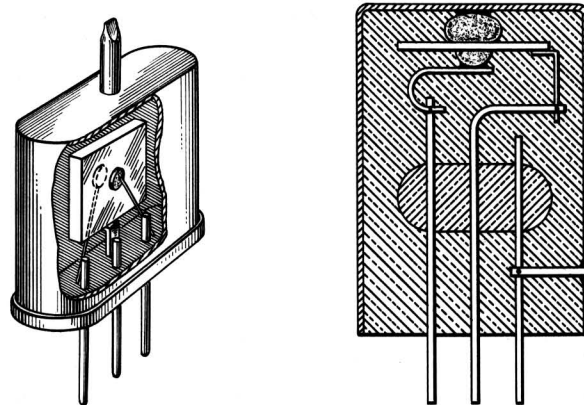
Assembly details of liquid cooled (left) and metallic conduction cooled (right) power transistors.
